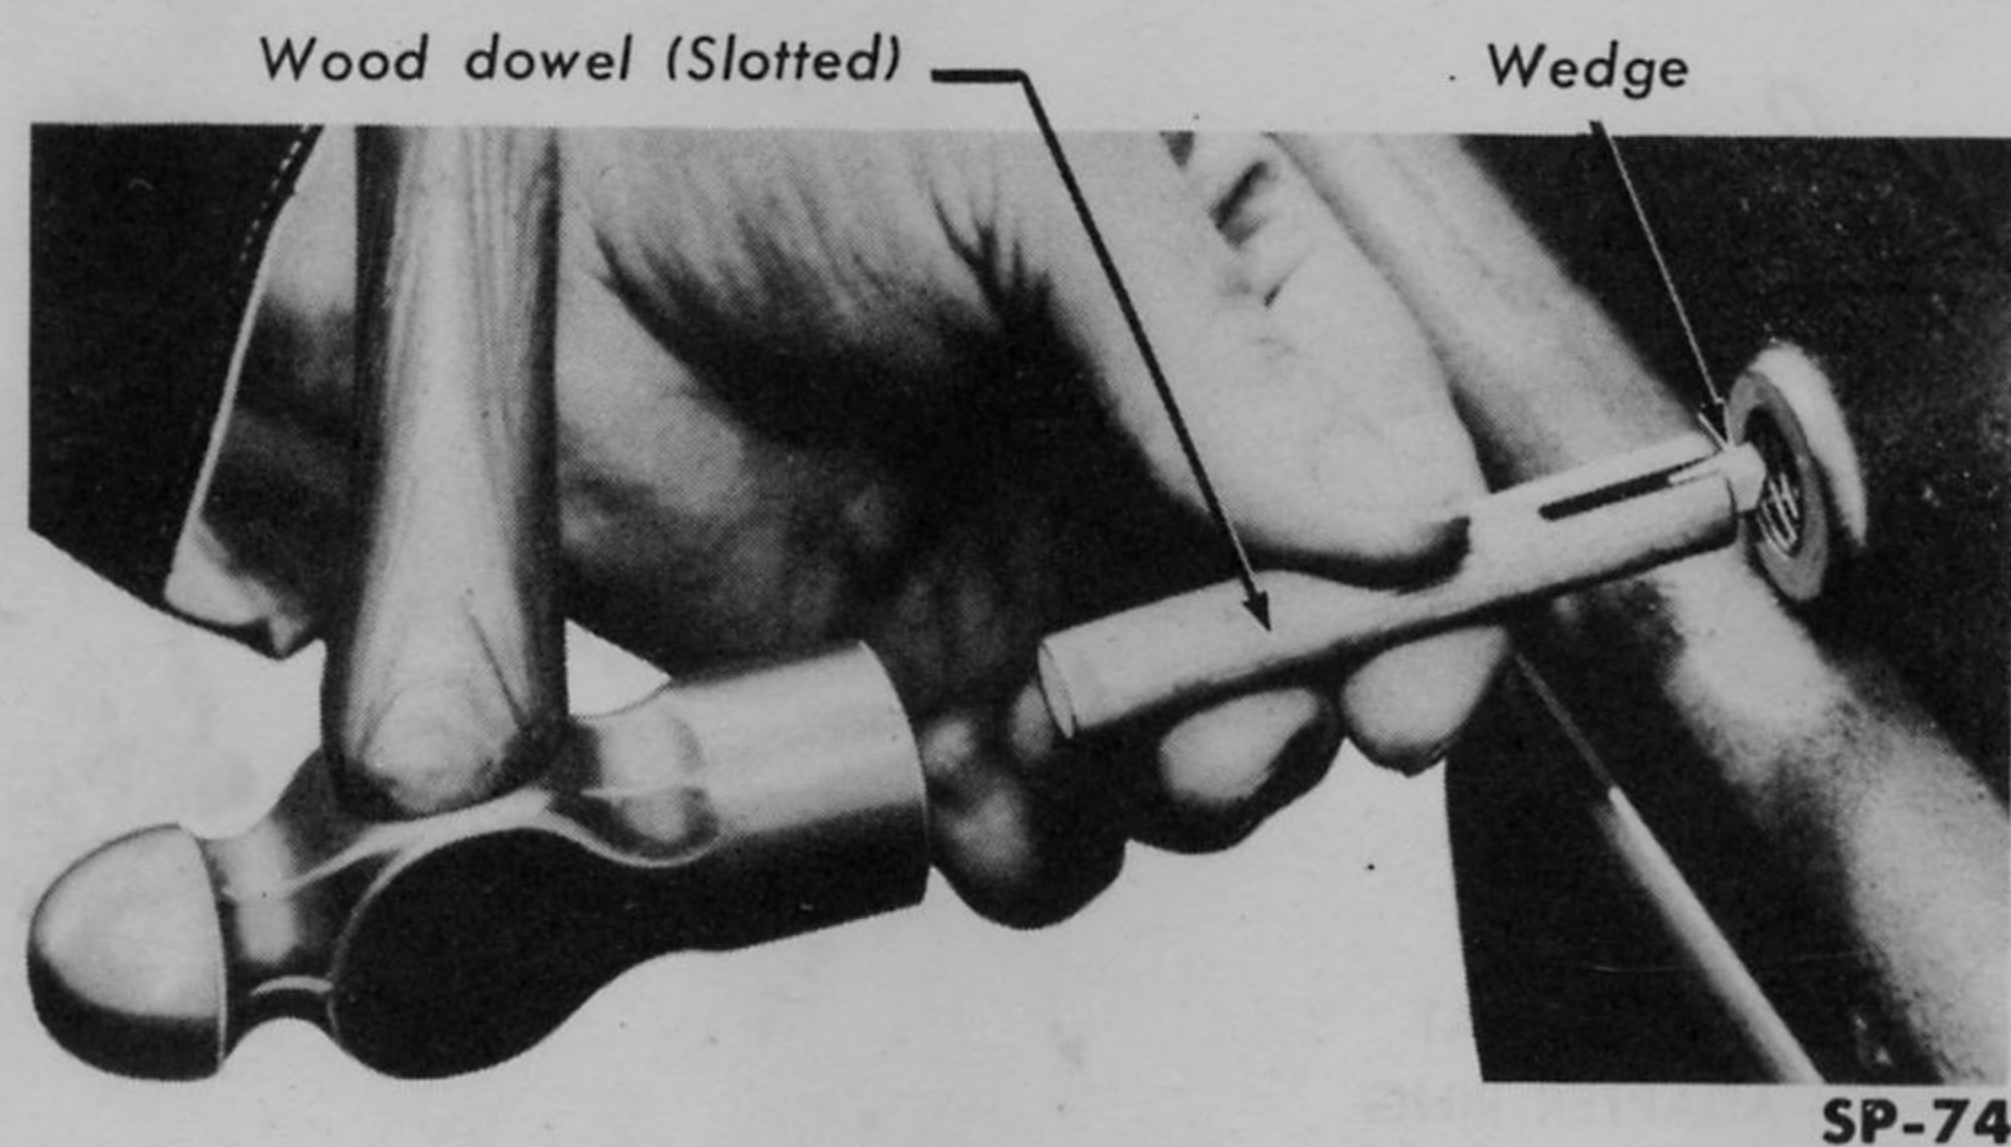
Removing Oil Pressure Relief Valve with Wedge
